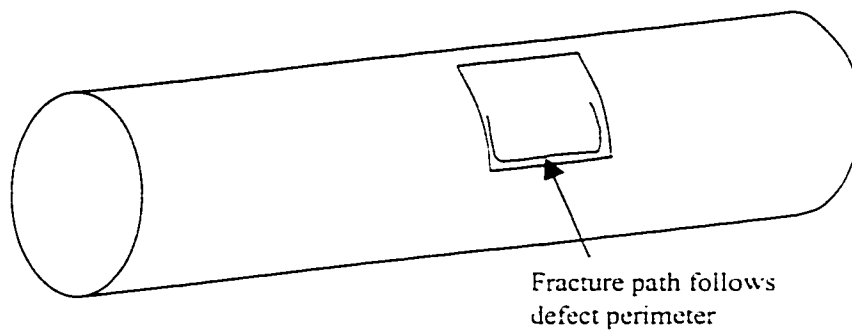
Typical fracture path for a flat-bottomed defect
